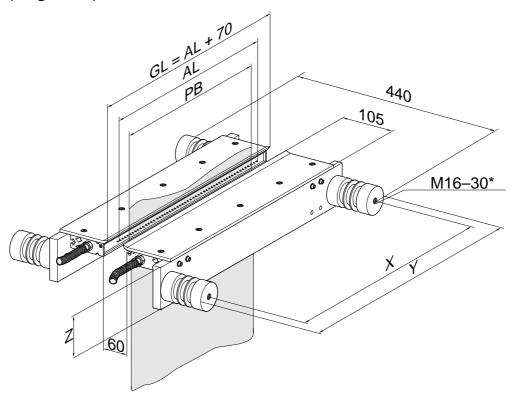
Dimensions, bracket ST/T1 and ST/H1
